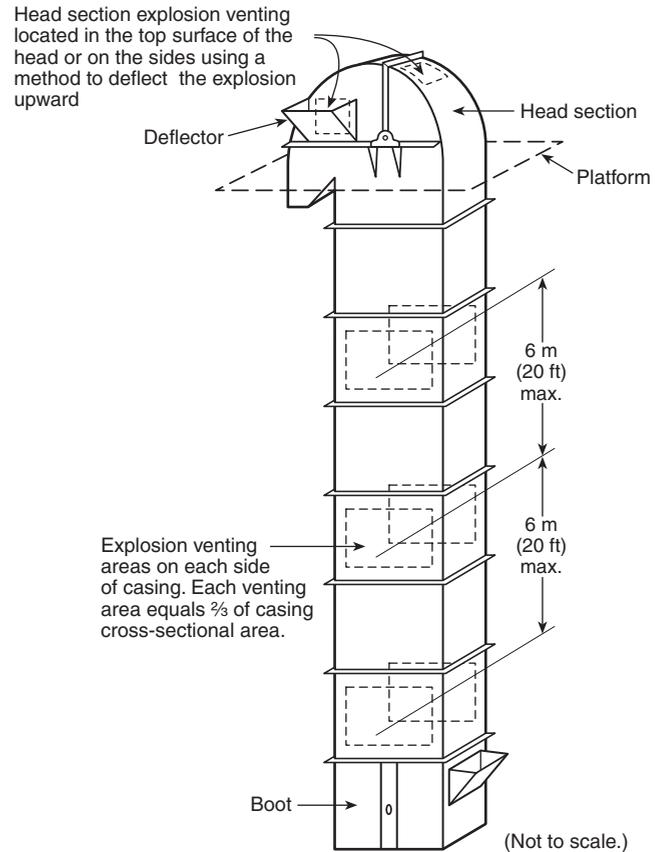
(a) Typical Elevator Explosion Venting for a Single Casing Leg.
